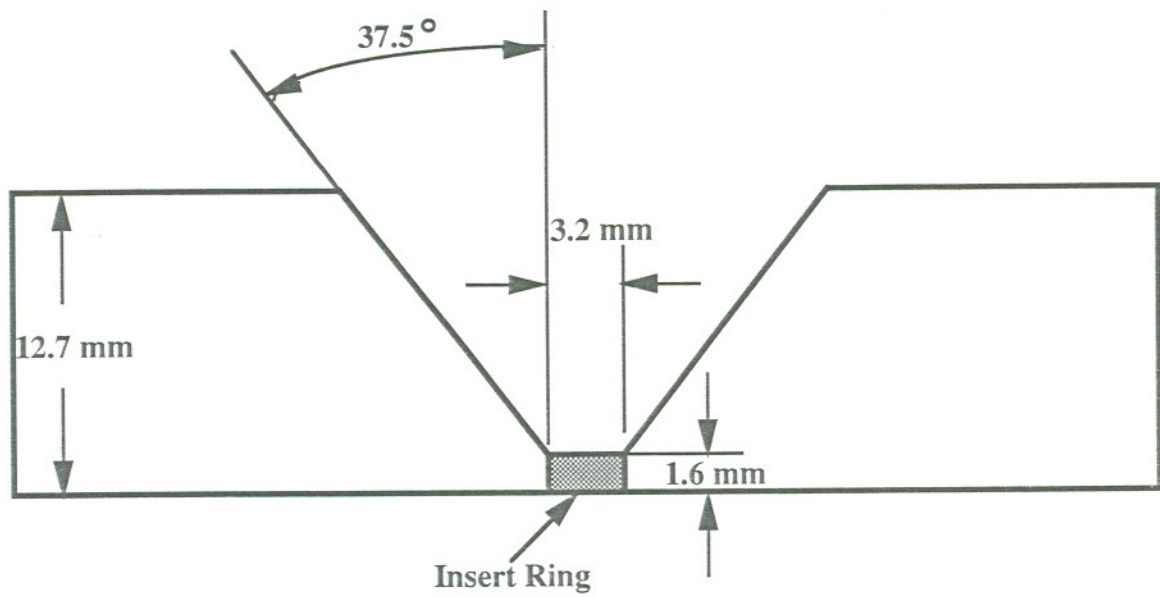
Weld Groove Geometry of the SRS Weldment
